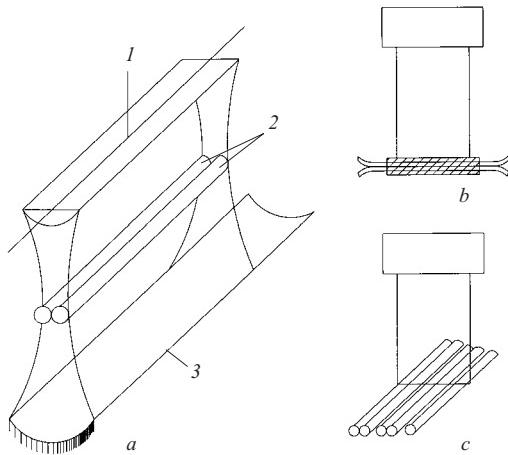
Optical train for welding light guides: *a*) focusing zone; *b* and *c*) welding of splitters and flat cables, respectively; 1) cylindrical ZnSe lens; 2) light guides; 3) cylindrical mirror.
